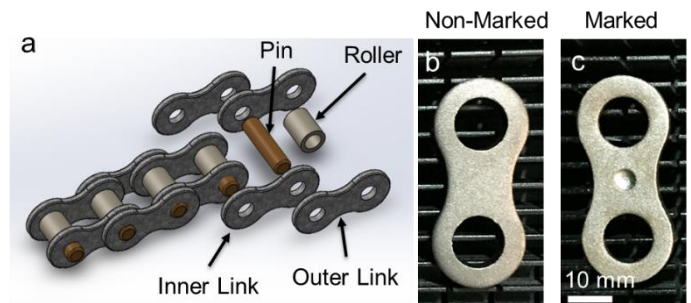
The chain and parts, (a) pin, roller, inner and outer links on a chain assembly, (b) non-marked link, (c) marked link.
